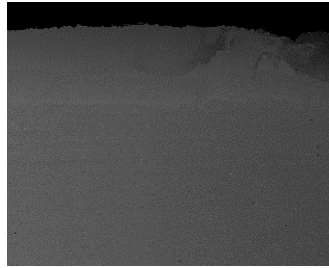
HE image of flank wear after 5<sup>th</sup> layer cutting
